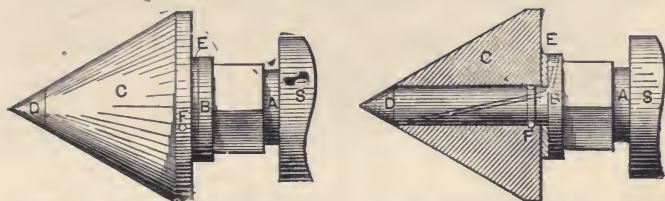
LATHE-CENTER FOR CUTTING OFF.
